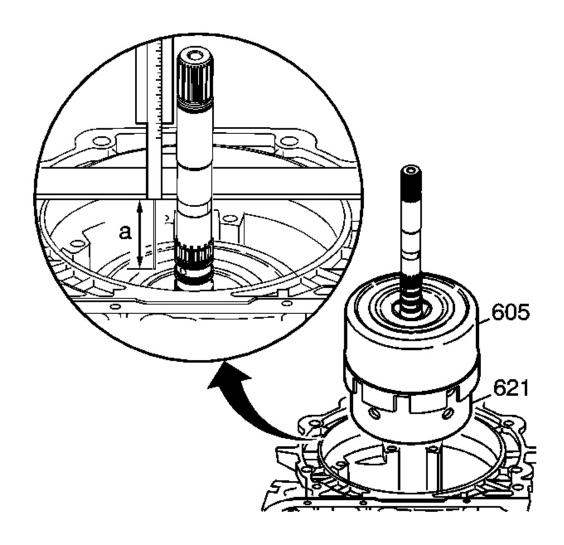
View Of Input Clutch Assembly & Input Housing Courtesy of GENERAL MOTORS CORP.
